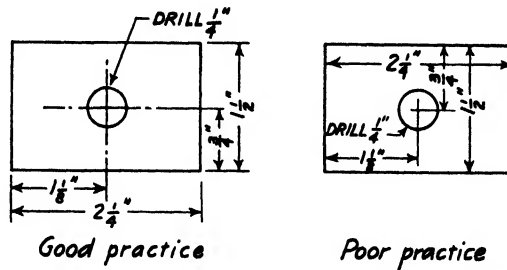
Do not place dimensions on a view unless it would make the drawing clearer.
